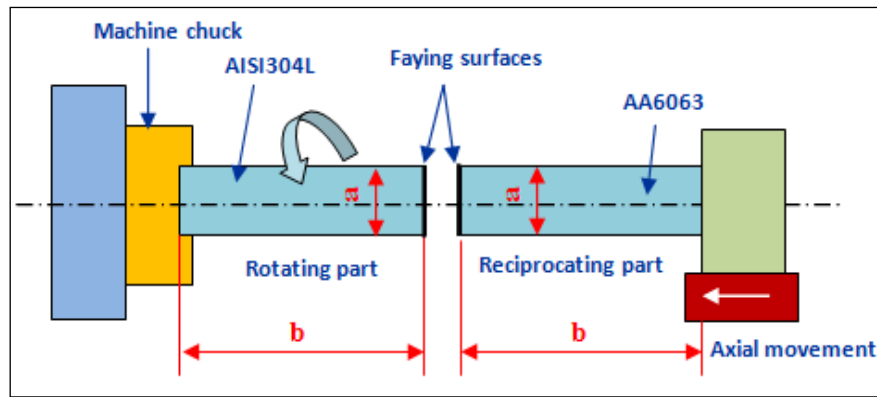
Graphic image of rotary friction welding set-up (a - rod diameter, b - length of samples to be welded)
